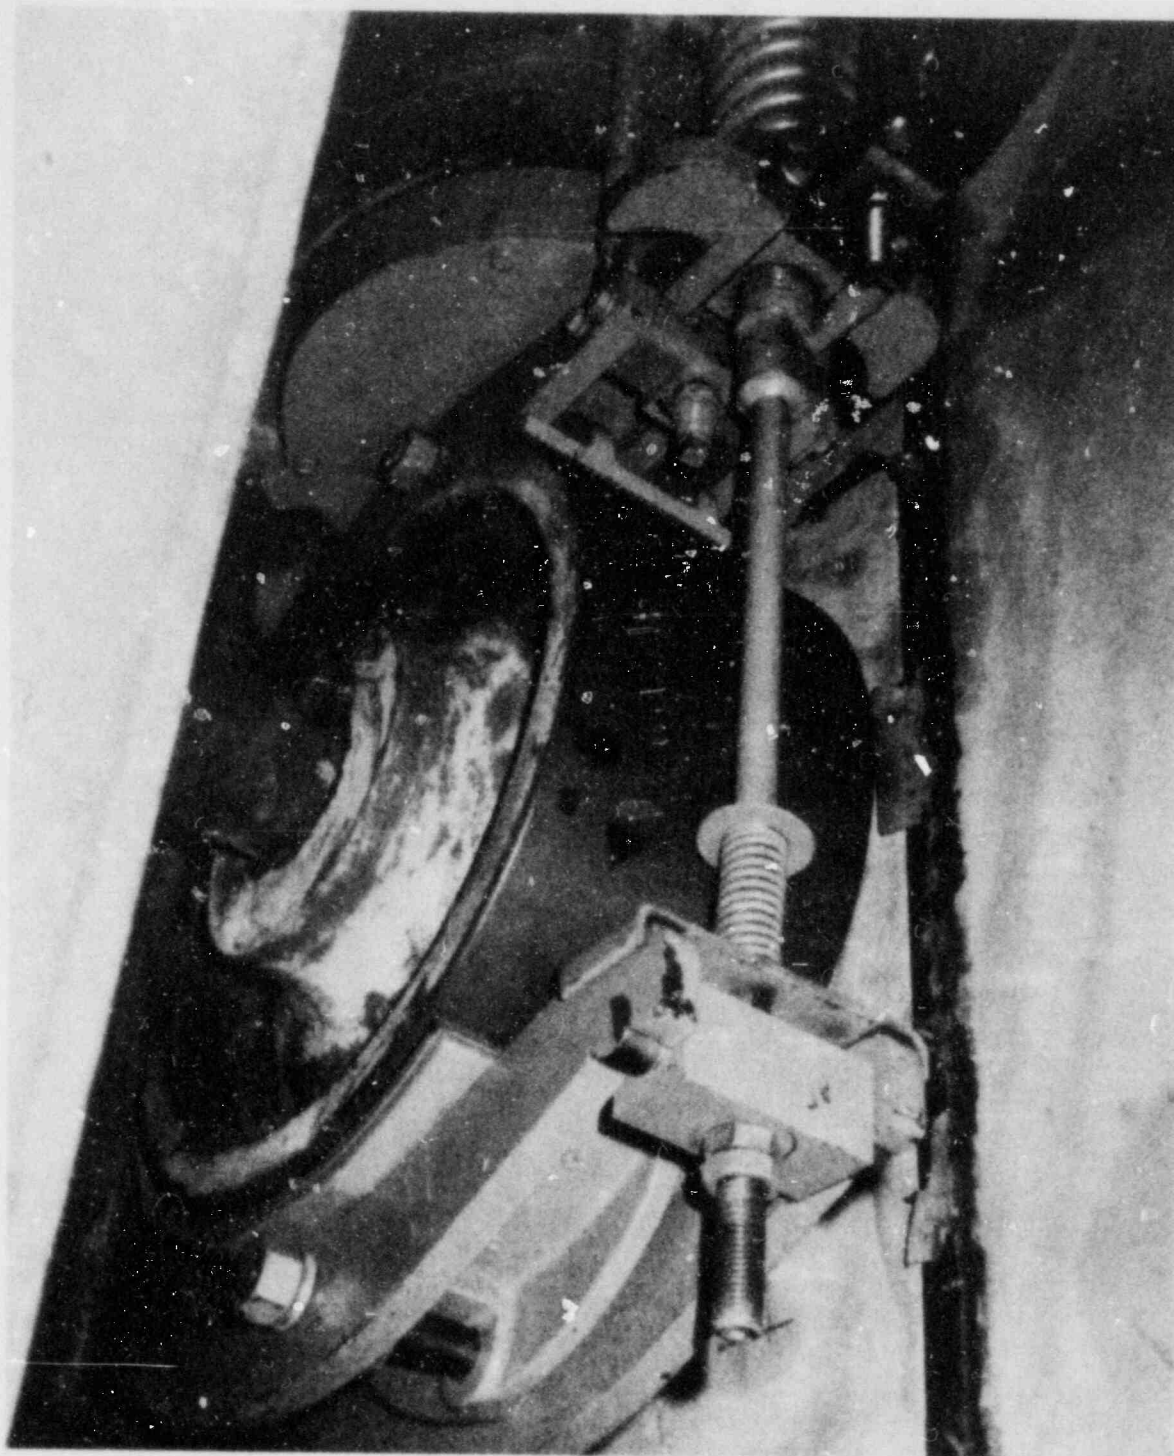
Refurbished main hoist magnetic drum brake assembly.
